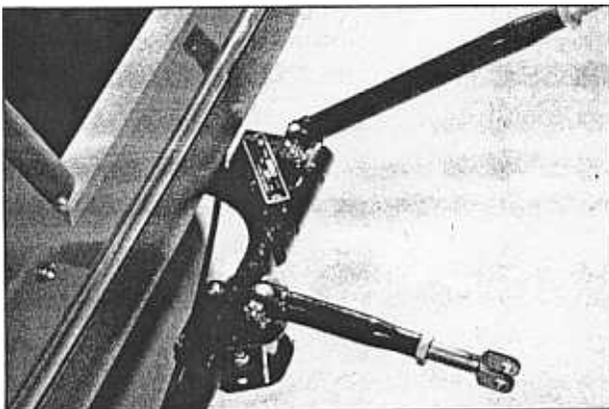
Rear short Strut assembled to Sliding Clamp. Eyebolts of rear long Strut assembled to sidecar frame. In all cases at least 2 inches of Clevis Adjusting Bolt must be inside Strut.
